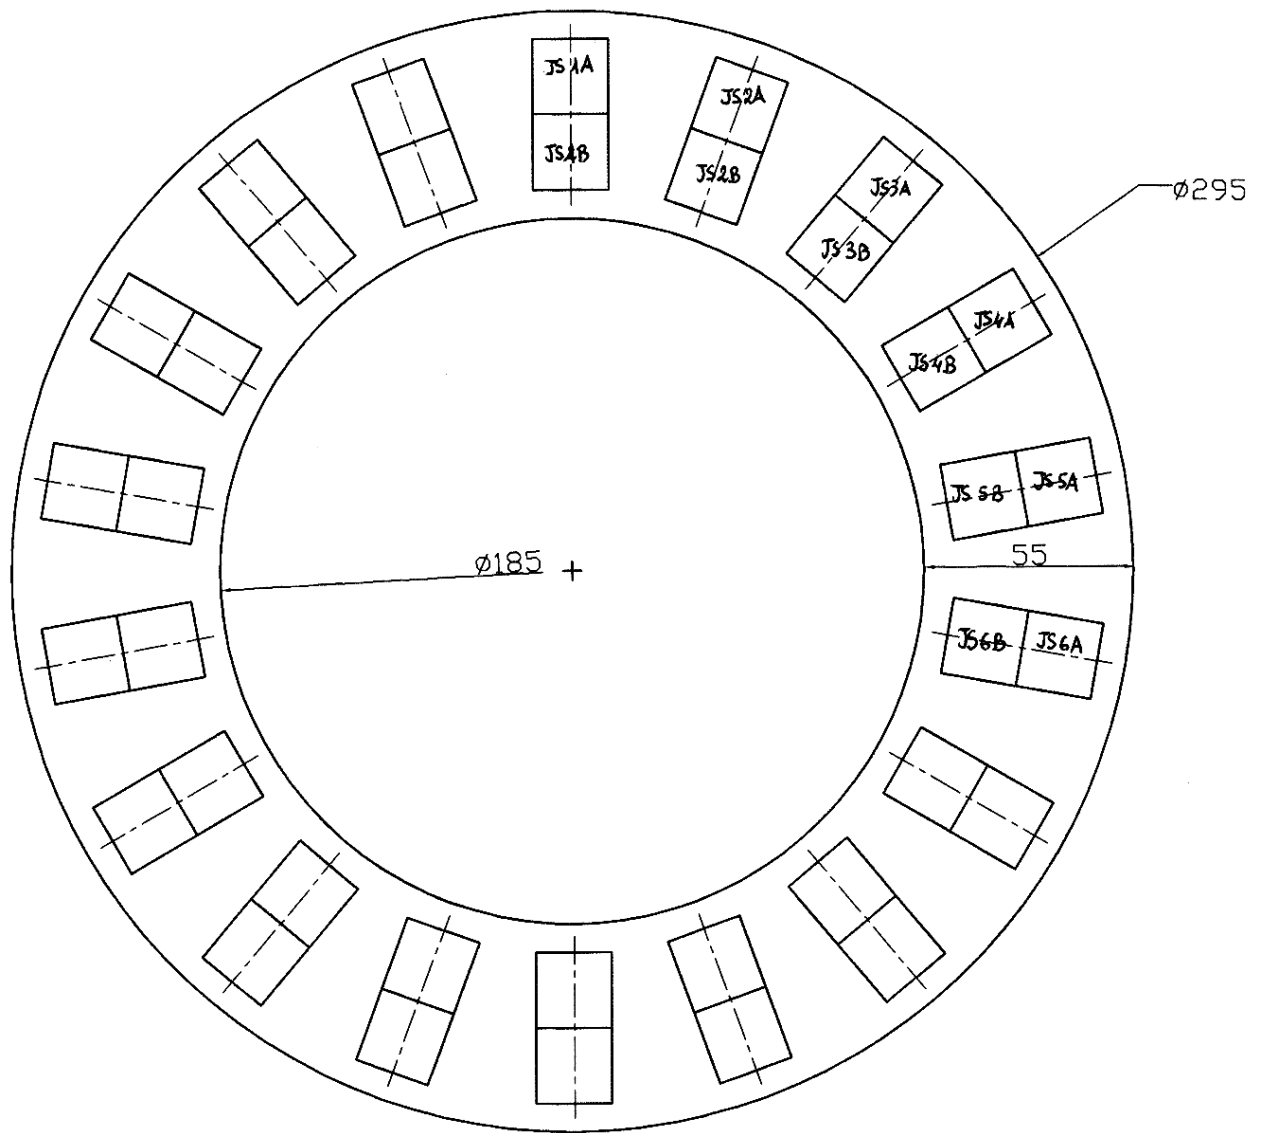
Location of creep test specimens in the WJP91 weldment
